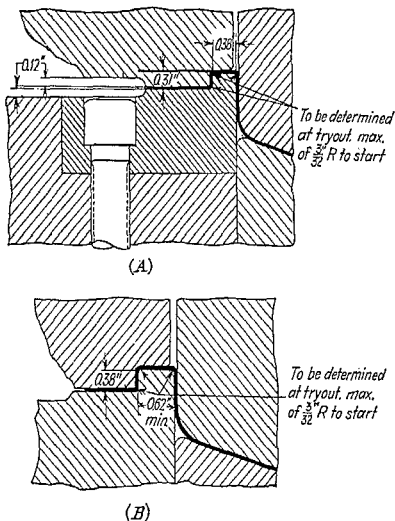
Locking heads: (A) insert type; (B) cast integral type.
